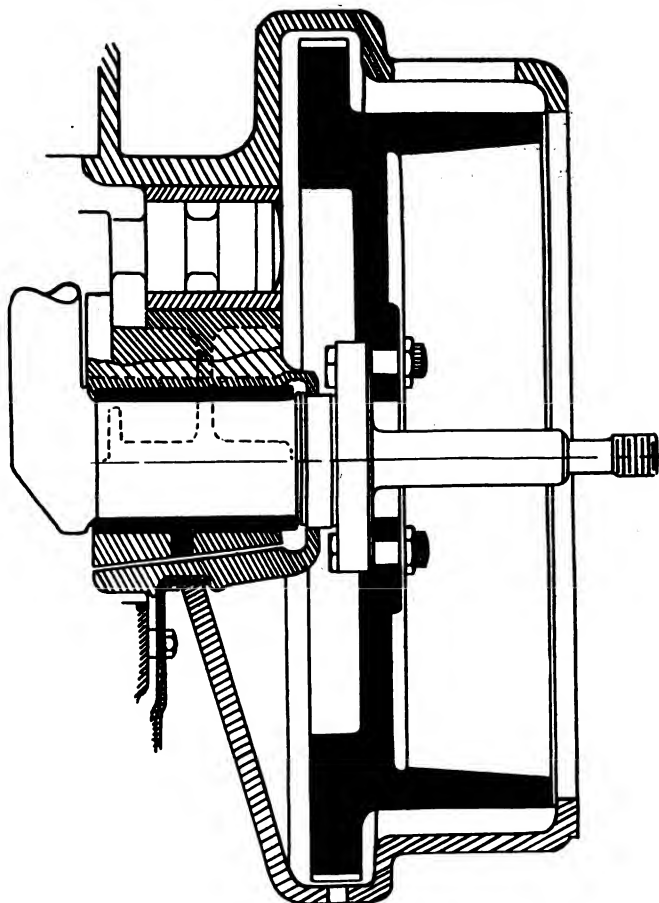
SECTIONAL ELEVATION OF A FLYWHEEL THAT CANNOT BE REMOVED UNTIL THE CRANKCASE IS DROPPED, THE CONNECTING-RODS DISCONNECTED AND THE MAIN BEARING CAPS REMOVED
